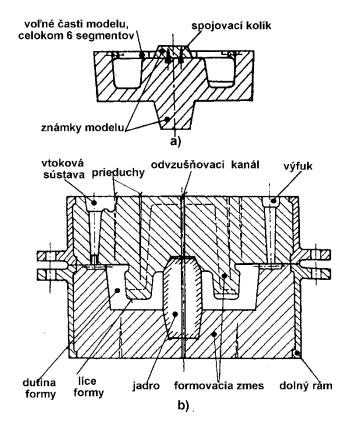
a) Sketch of split pattern, b) Sketch of mould
